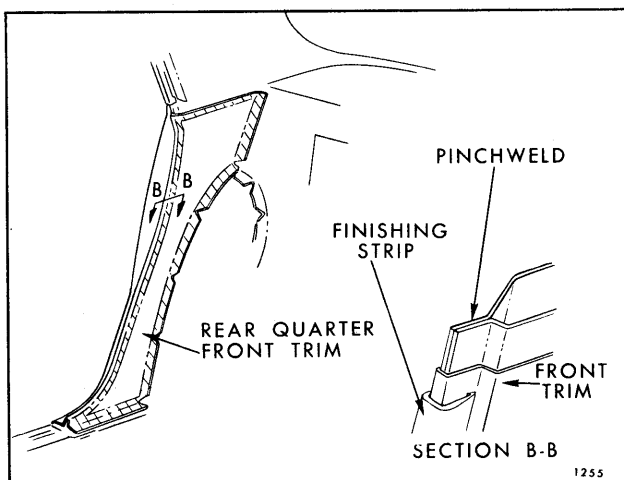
Rear Quarter Trim Assembly - "A" Four - Door Styles
